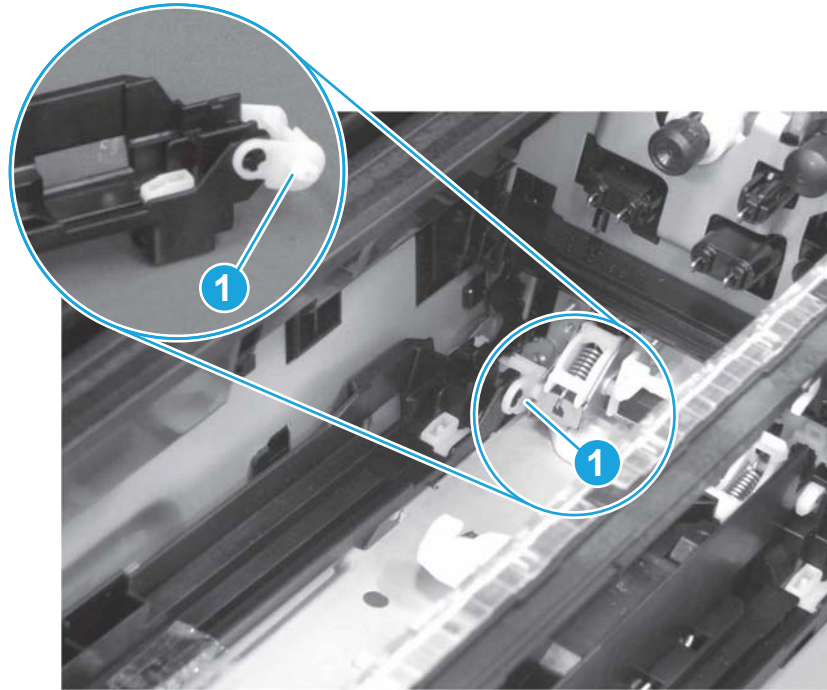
Position the DT-cartridge rail assembly (M751/E75245/M856/E85055/M776dn/M776z/M776zs)
